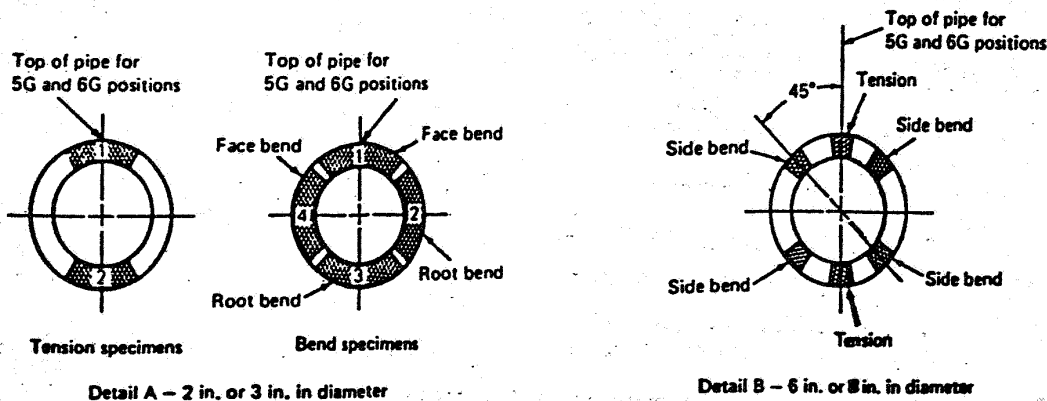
A—Location of test specimens on welded test pipe
